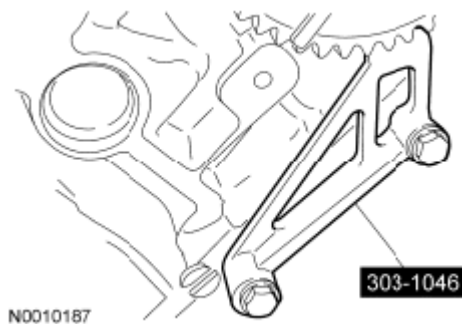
Identifying Cam Phaser Locking Tool (303-1046)
